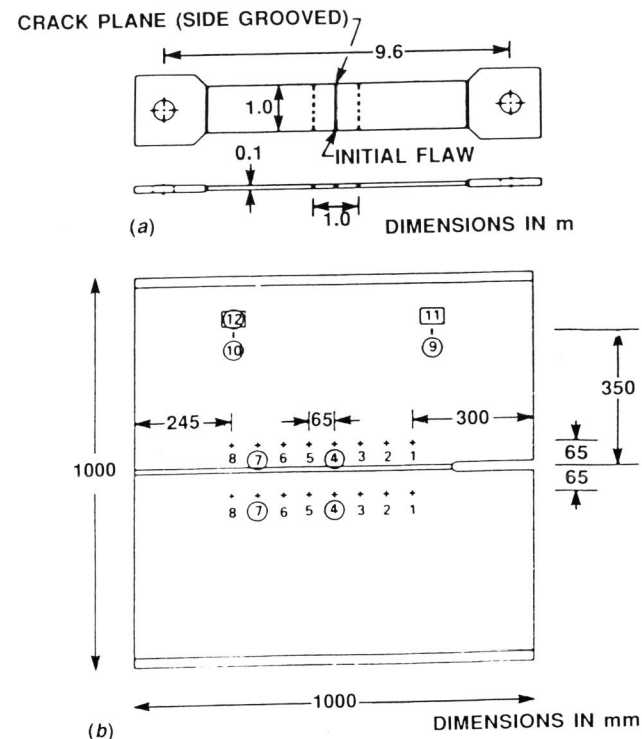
Wide-plate assembly and crack-arrest specimen: (a) pull-plate assembly; (b) specimen with strain-gage locations.
